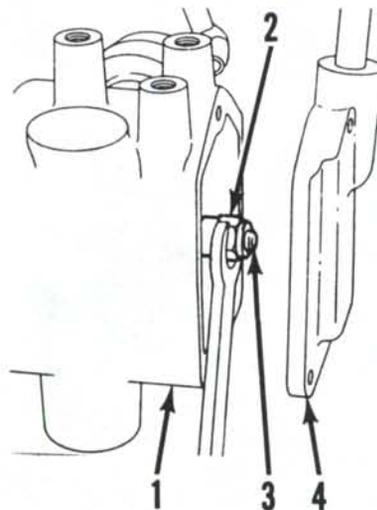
View showing location of locknut used to adjust connecting link on cab or platform equipped models.
